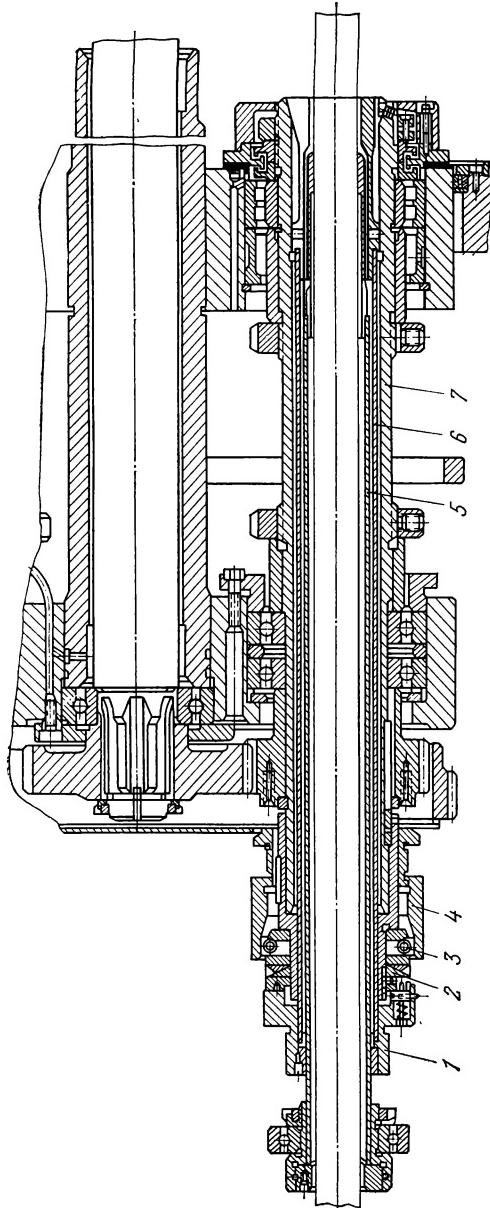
Chucking device with the clamping force transmitted through a spring:
